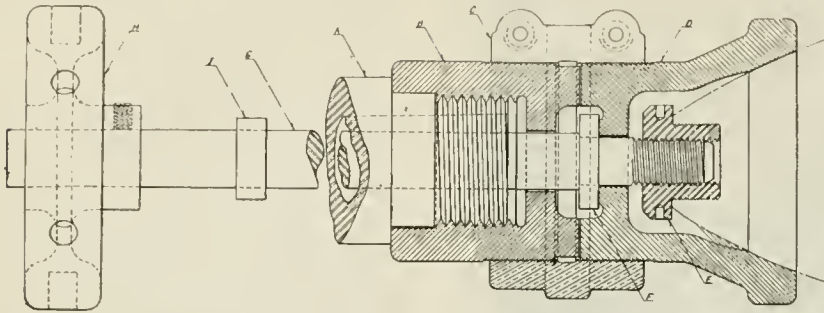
ASSEMBLY OF DRIVING DEVICE FOR HOB-MILLING BASE.
